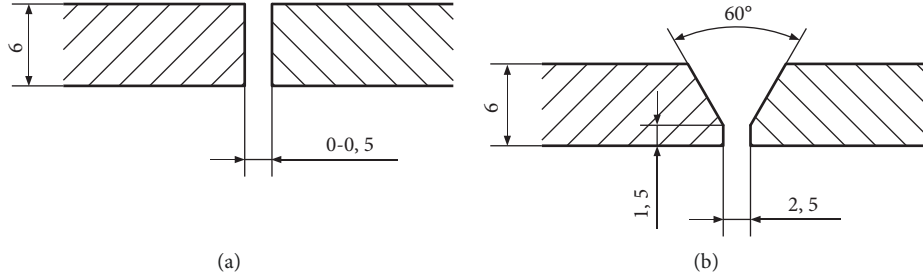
Geometry of welded elements prior to the implementation of joints: I-shaped (a) and V-joints (b).
